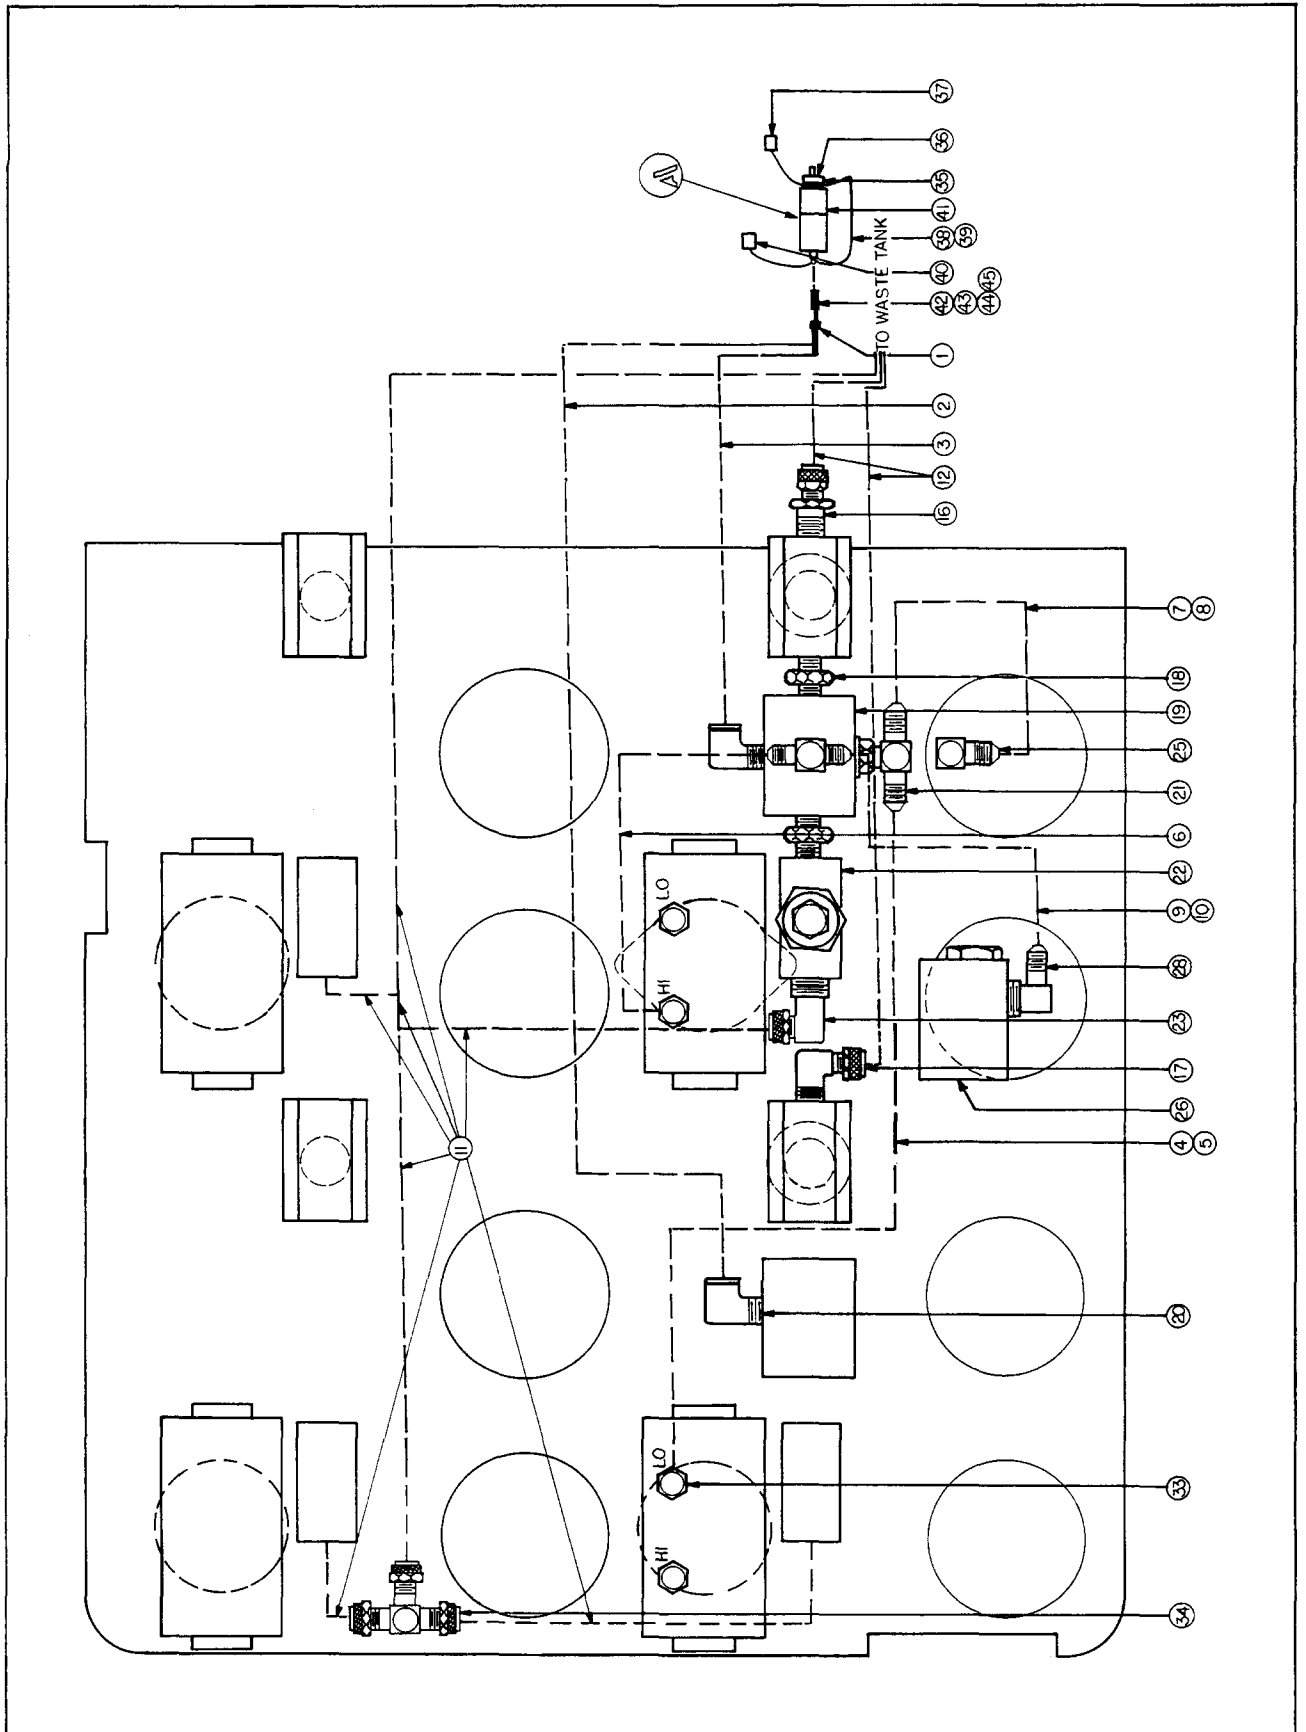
Panel Assembly (Sheet 2 of 3)
